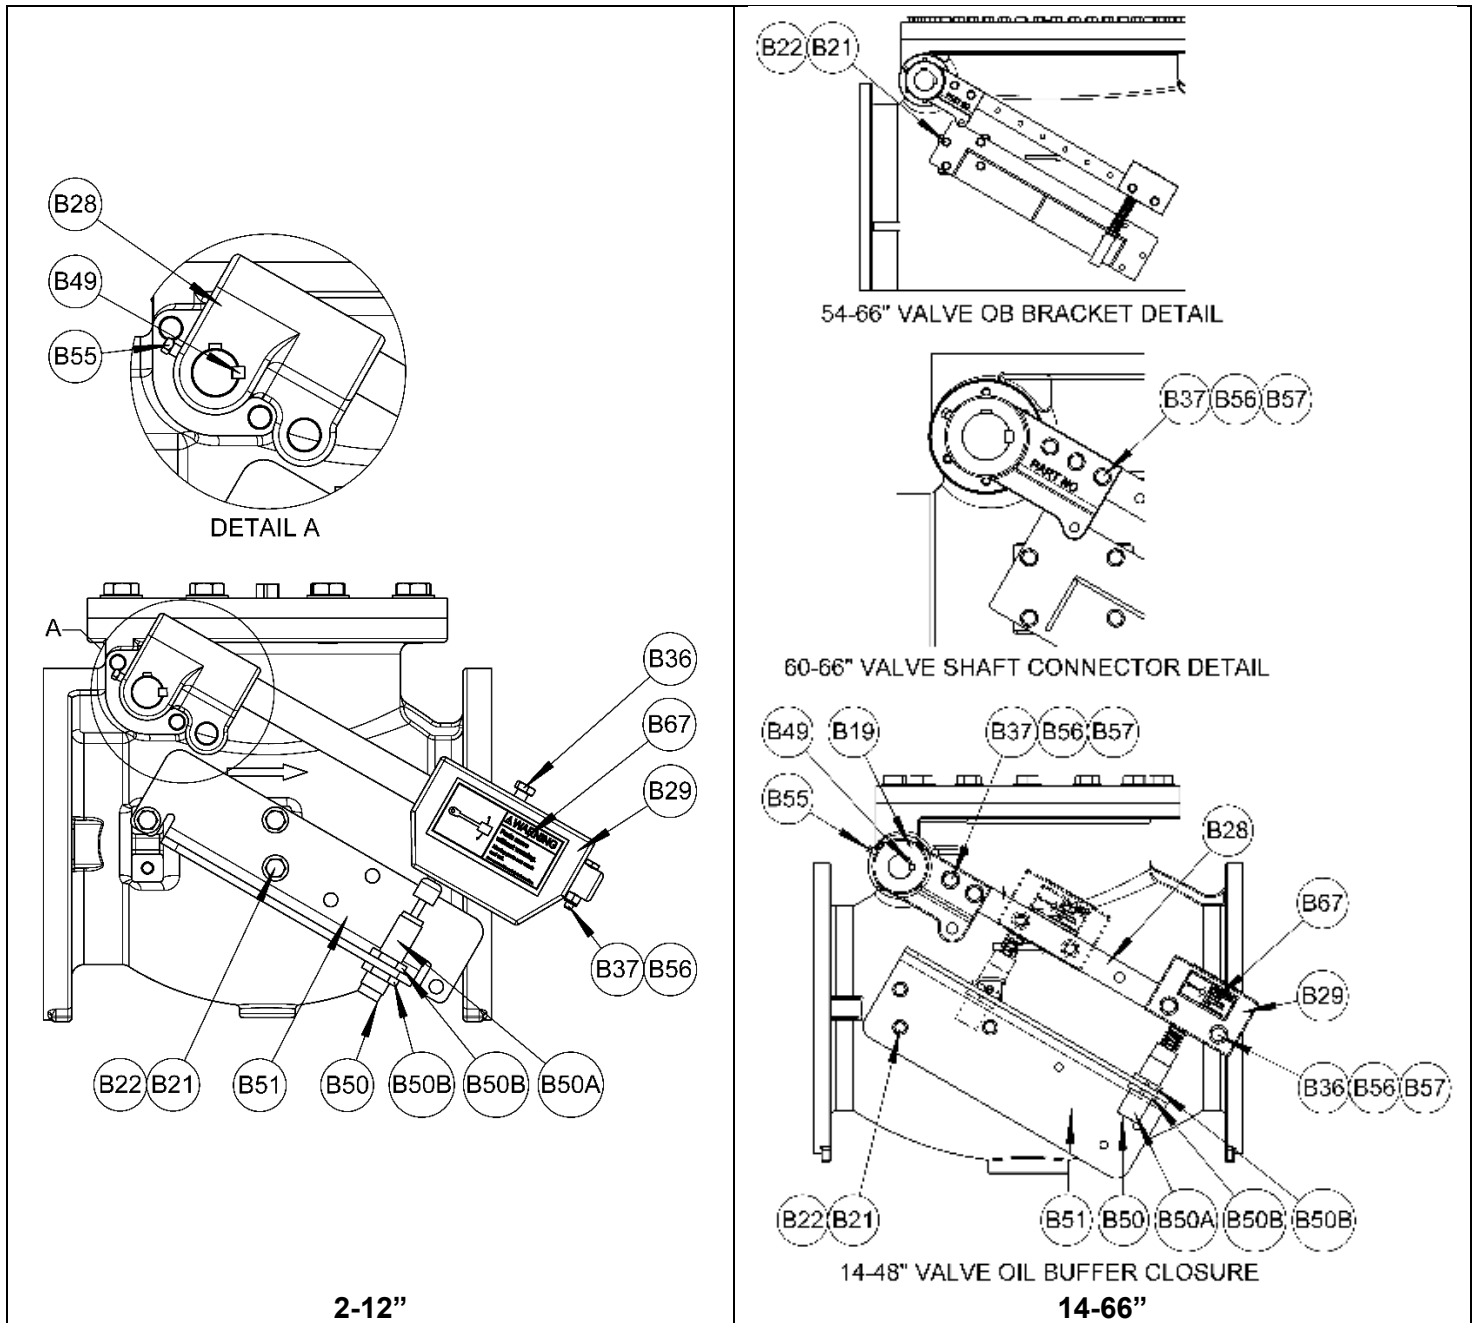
Lever & Weight with Oil Cushion (OB) Assembly 2-66" – Horizontal Installation
